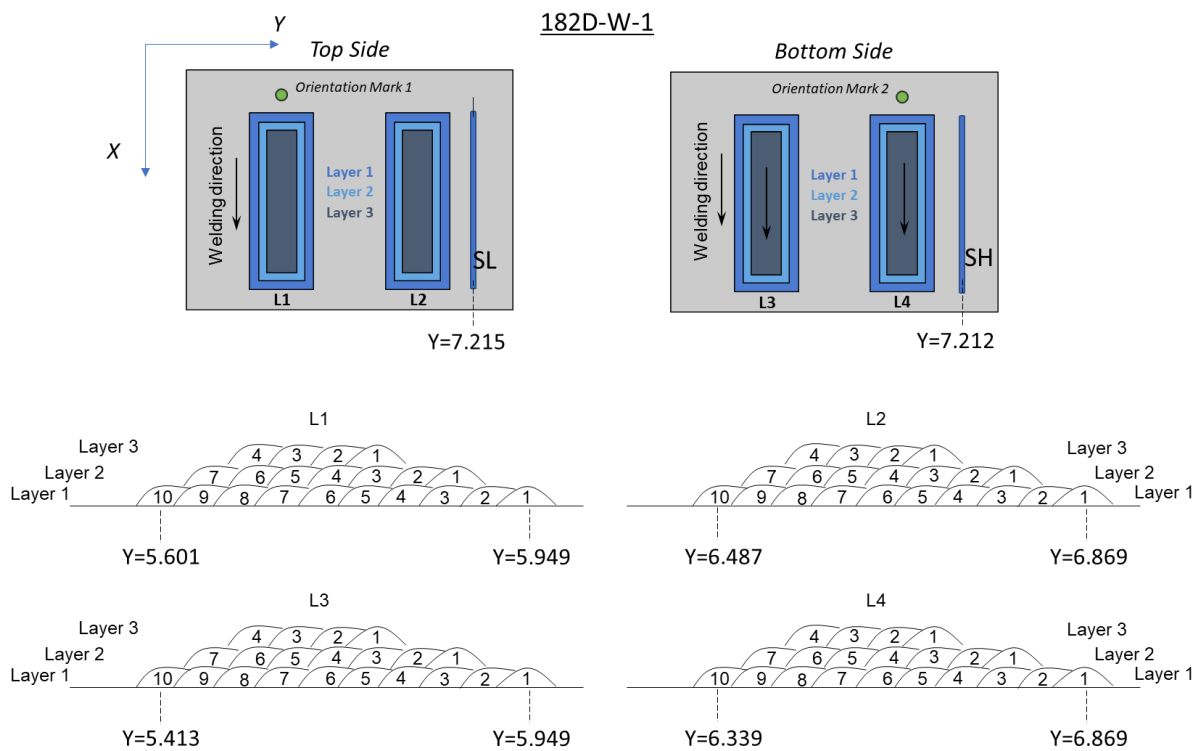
Weld Layout for LW of Irradiated Coupons.
